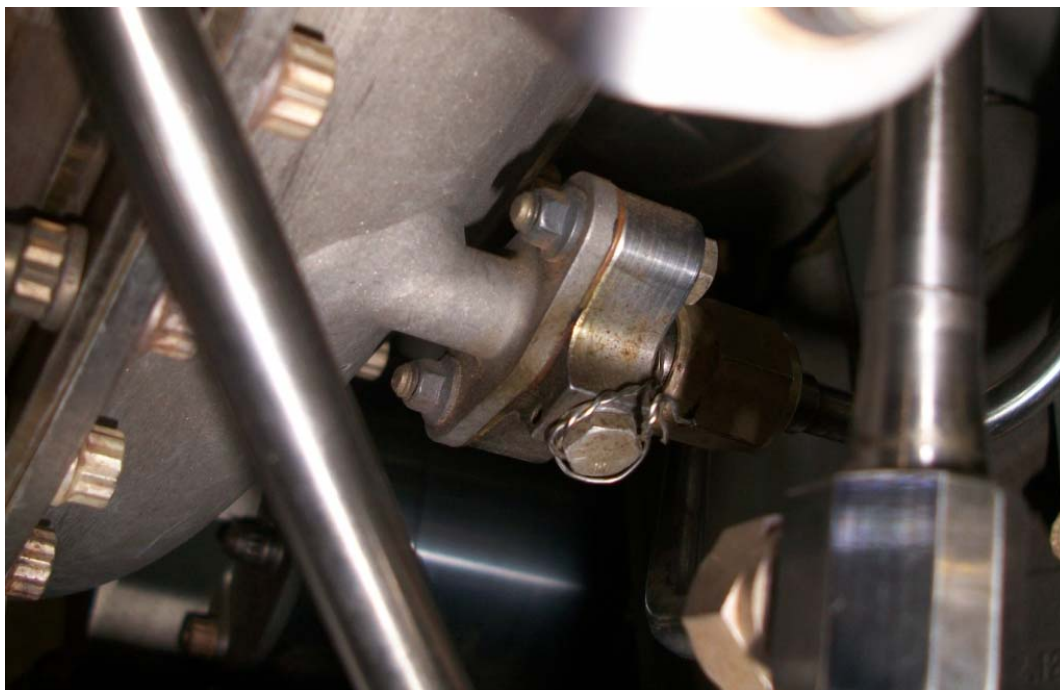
Photo of exemplar installation of fuel union at the compressor case. Note about 1 1/2 threads visible on exposed bolt heads.
